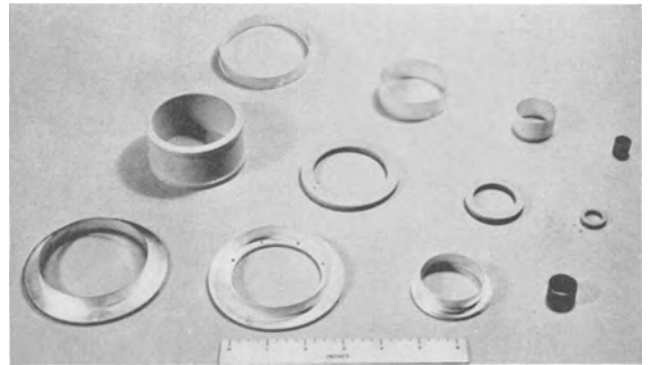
Component metal and ceramic parts of experimental tetrode prior to assembly.
